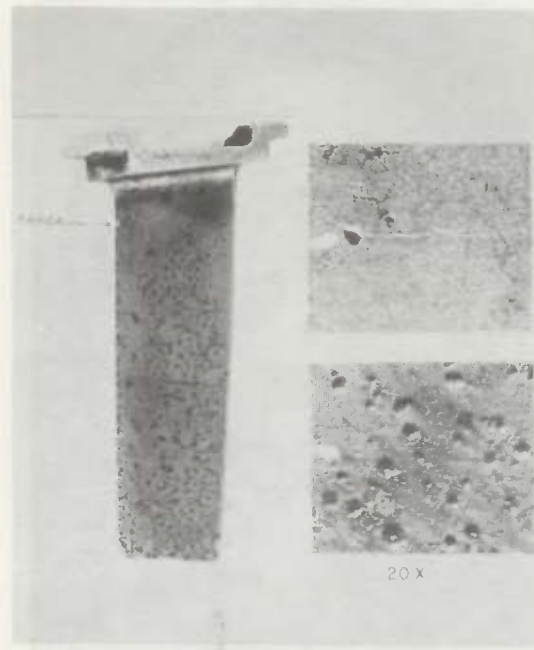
Fatigue crack initiated at corrosion pit on stator blade
